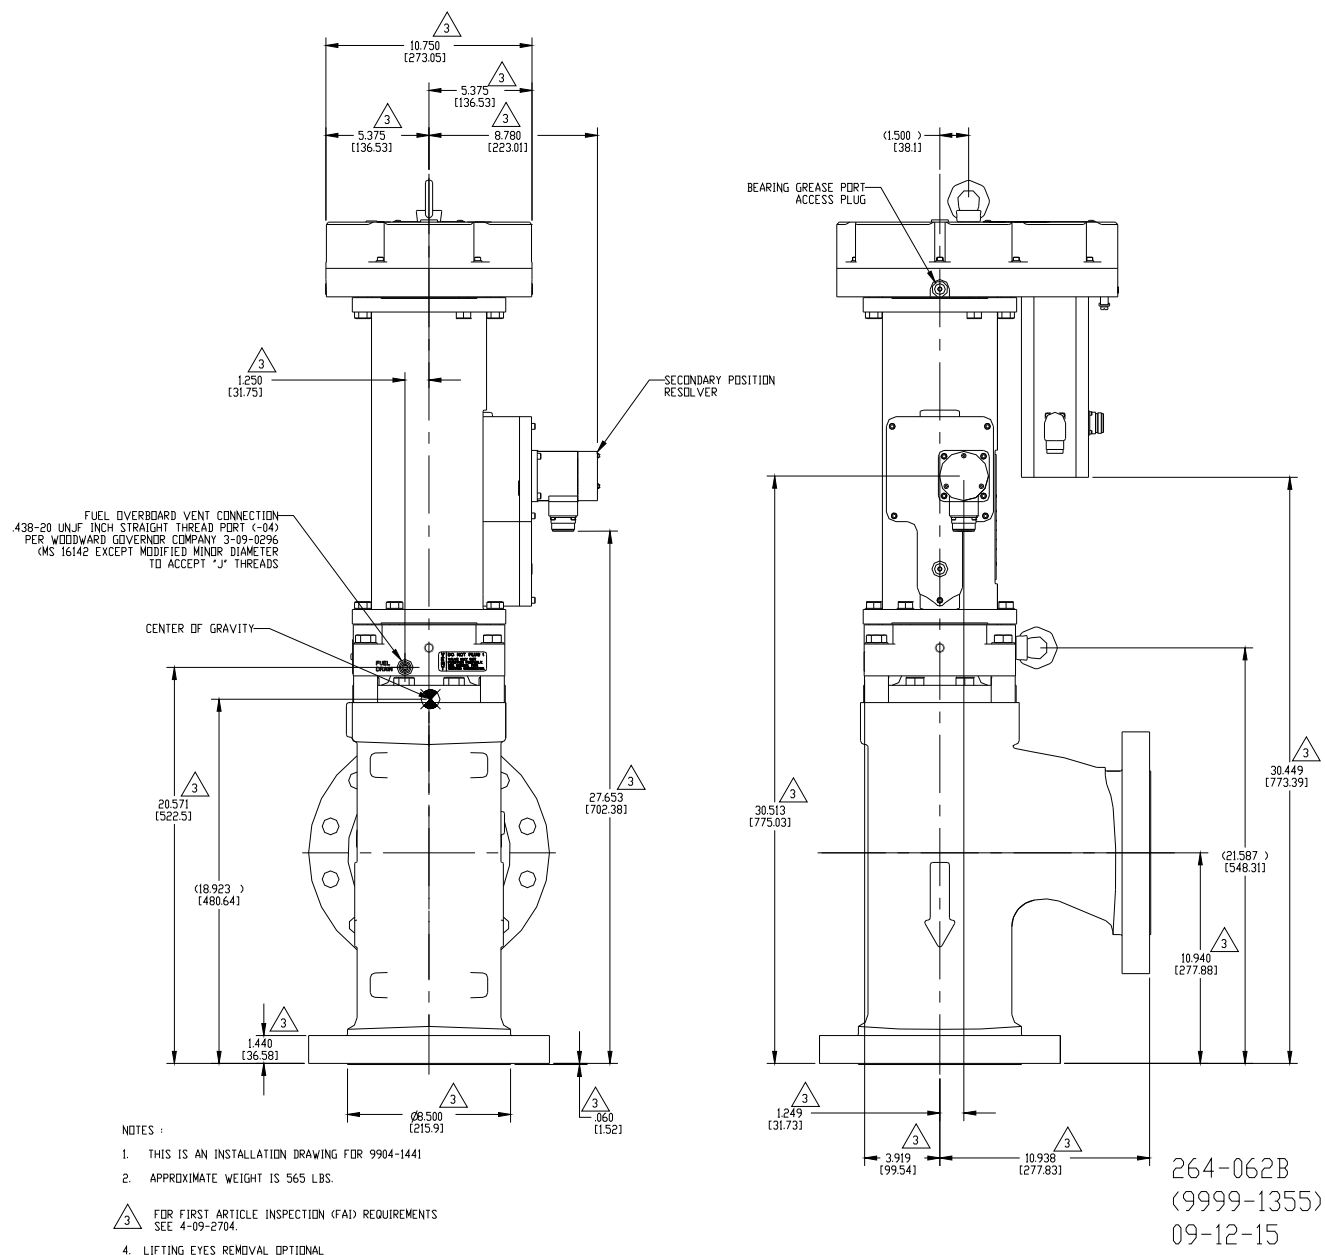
Outline Drawing 6" LESV (Right View)
